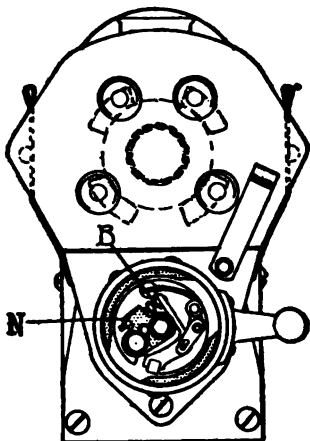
View of Bosch magneto, showing the breaker points B and means of adjusting N.
